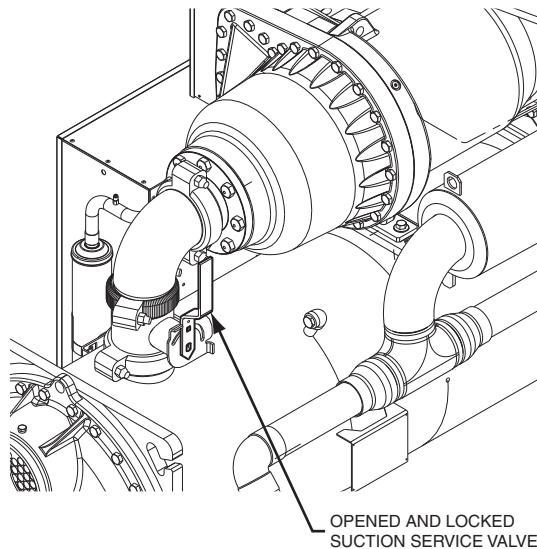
Suction Service Valve Locking Device, Open and Locked
